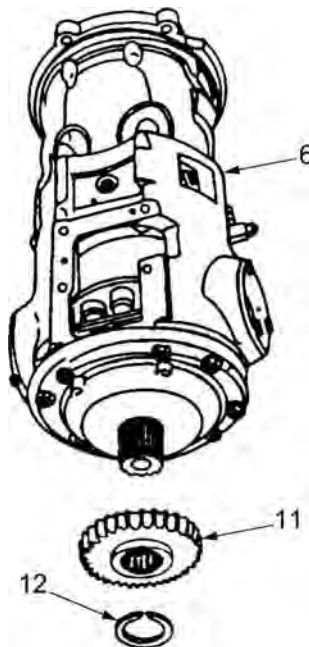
32-Tooth Hydrostatic Gear Removal.
